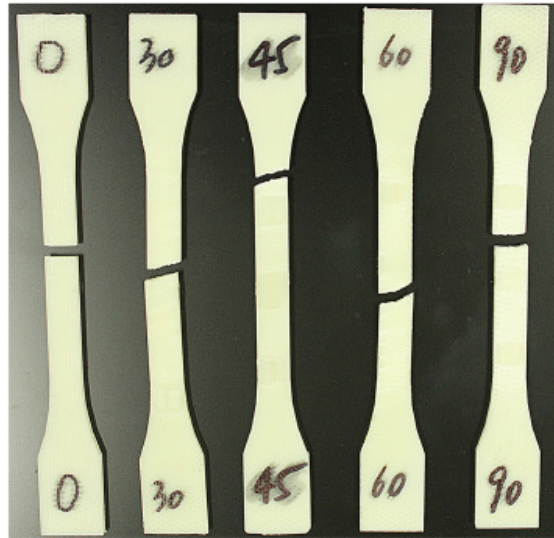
Experimental testing of anisotropic fracture of additively manufactured parts. The crack patterns with layer orientations 0° , 30° , 45° , 60° , 90° [148]. Figure reproduced from [148].
